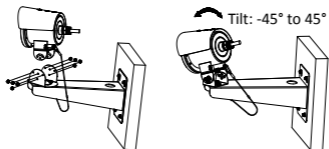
Secure the Camera to Wall Mounting Bracket
